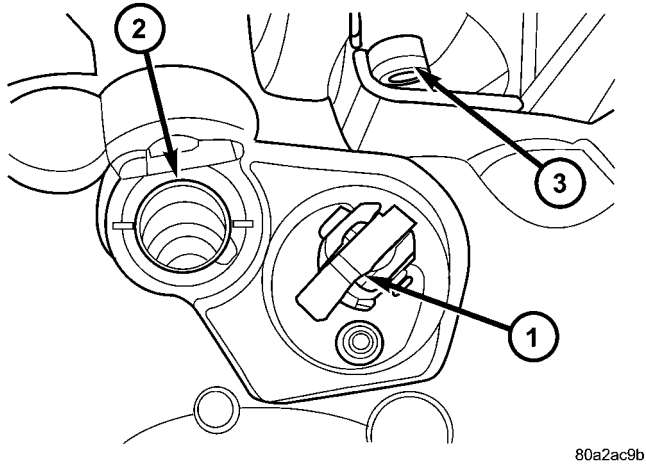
INPUT SHAFT AND COUNTERSHAFT BEARING RACE
